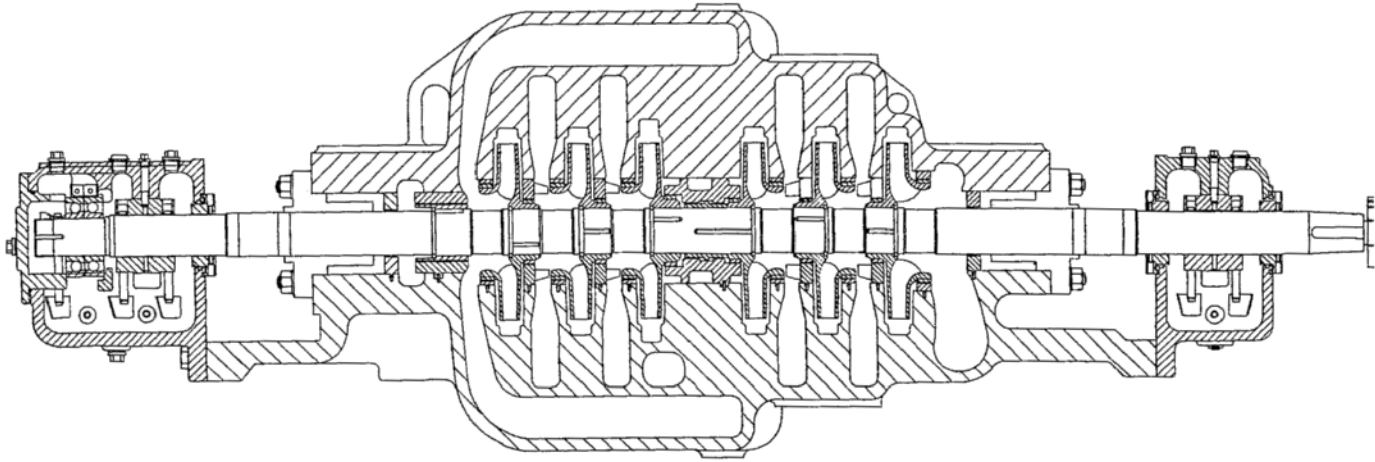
Single-suction, double-volute, axially split, six-stage pipeline pump (Flowserve Corporation)
